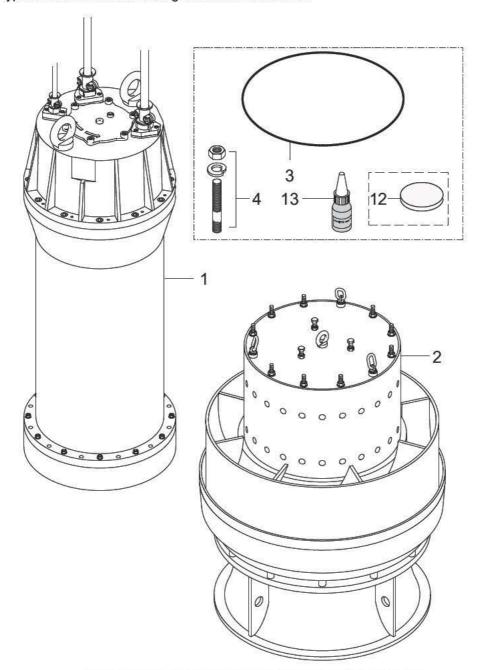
Assembling the motor and the gearbox/hydraulic unit
